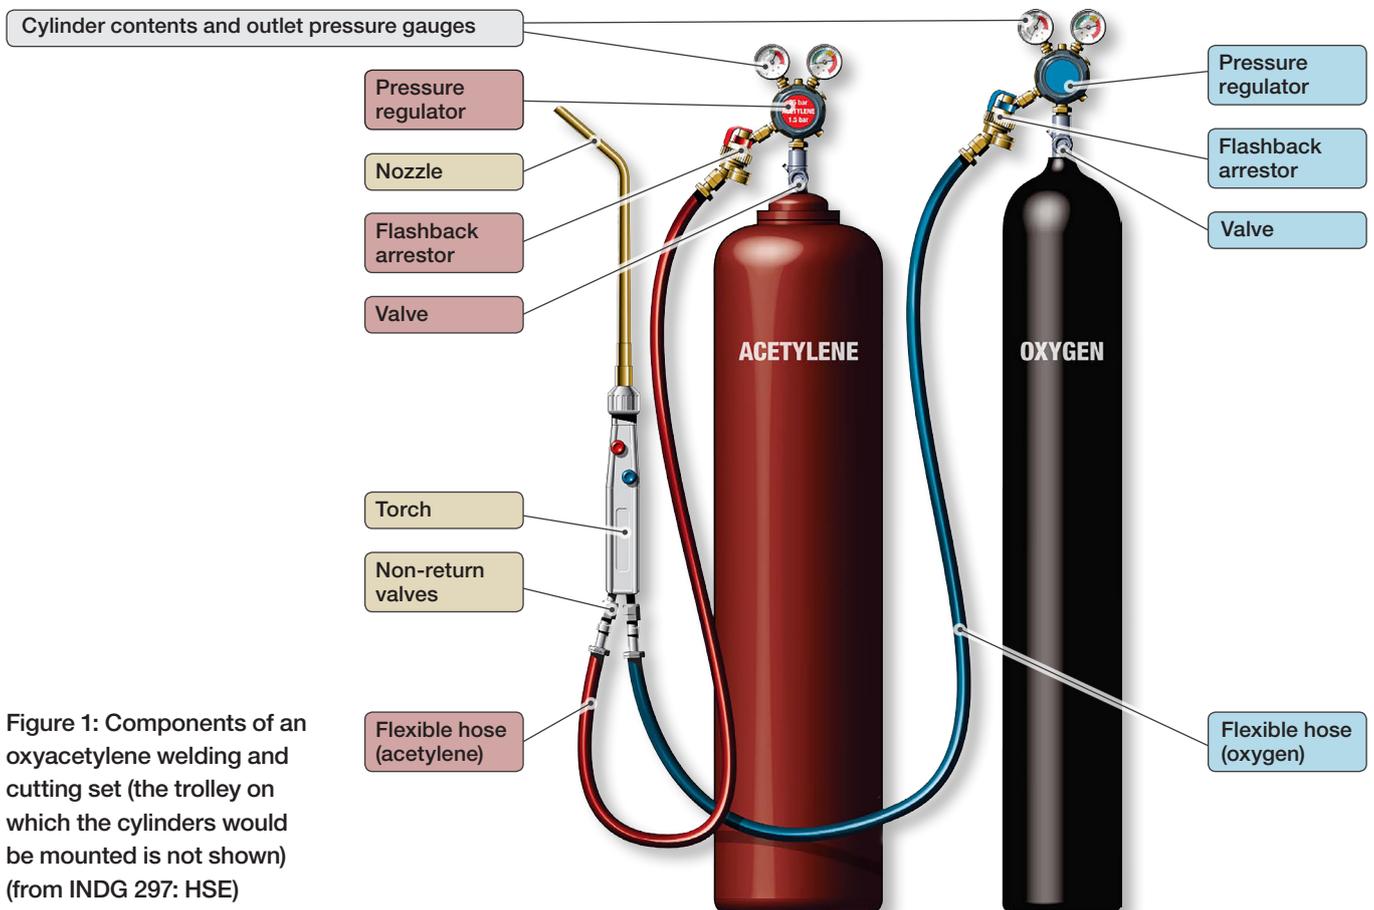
Components of an oxyacetylene welding and cutting set (the trolley on which the cylinders would be mounted is not shown) (from INDG 297: HSE)
